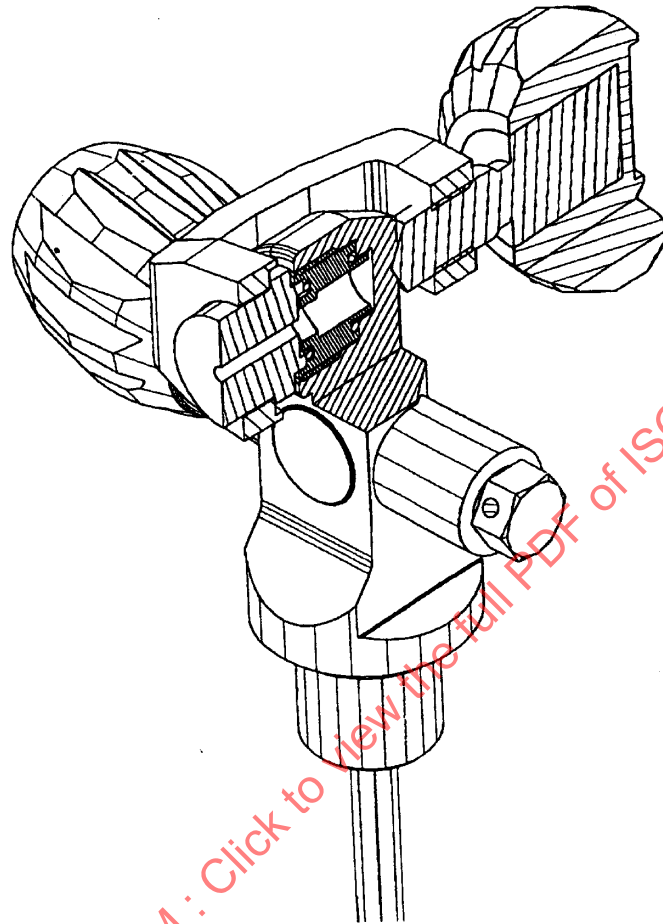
Adaptor connection 230 bar — Assembly drawing
